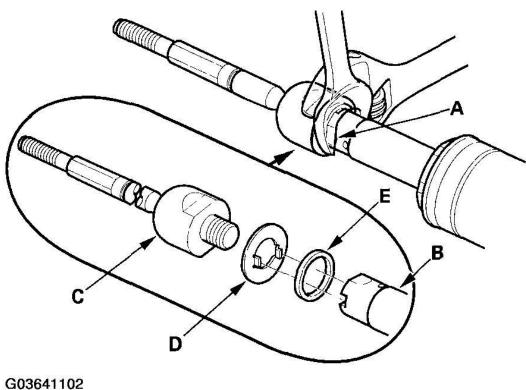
Holding Flat Surface Sections Of Steering Rack Using Wrench Courtesy of AMERICAN HONDA MOTOR CO., INC.
